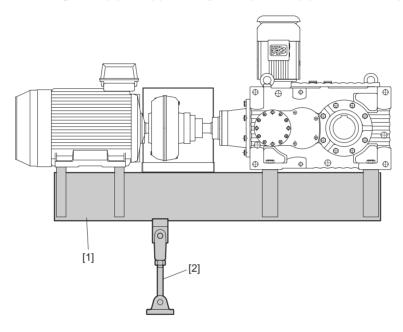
Industrial gear unit of the MC.. series on swing base with torque arm
